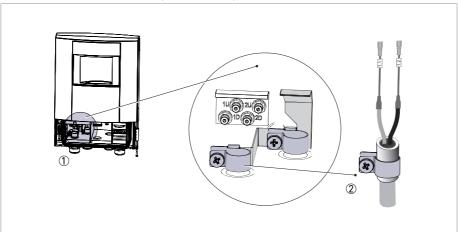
Inserting cable and secure with clamp on shielding bush
